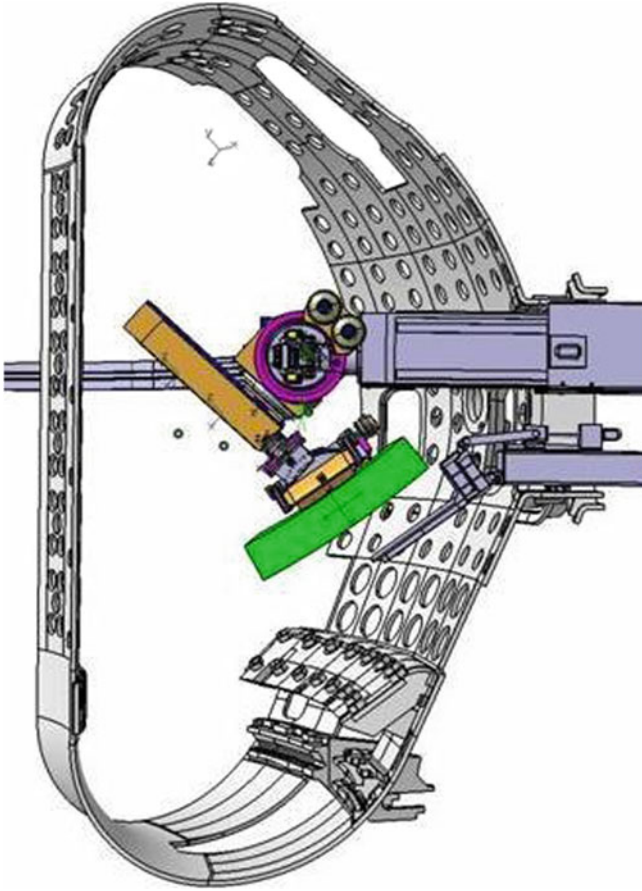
A manipulator lifting one blanket module inside the vacuum chamber. The other blanket modules are not shown (Courtesy of ITER Organization)
